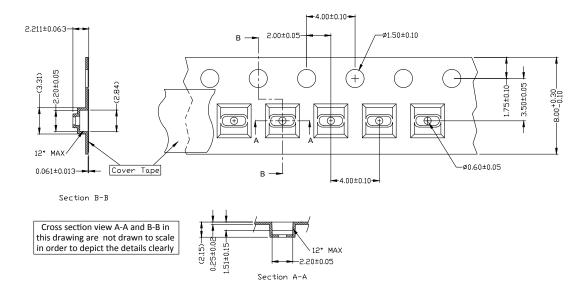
Pocket Tape dimensions for LUXEON C Color Line.
